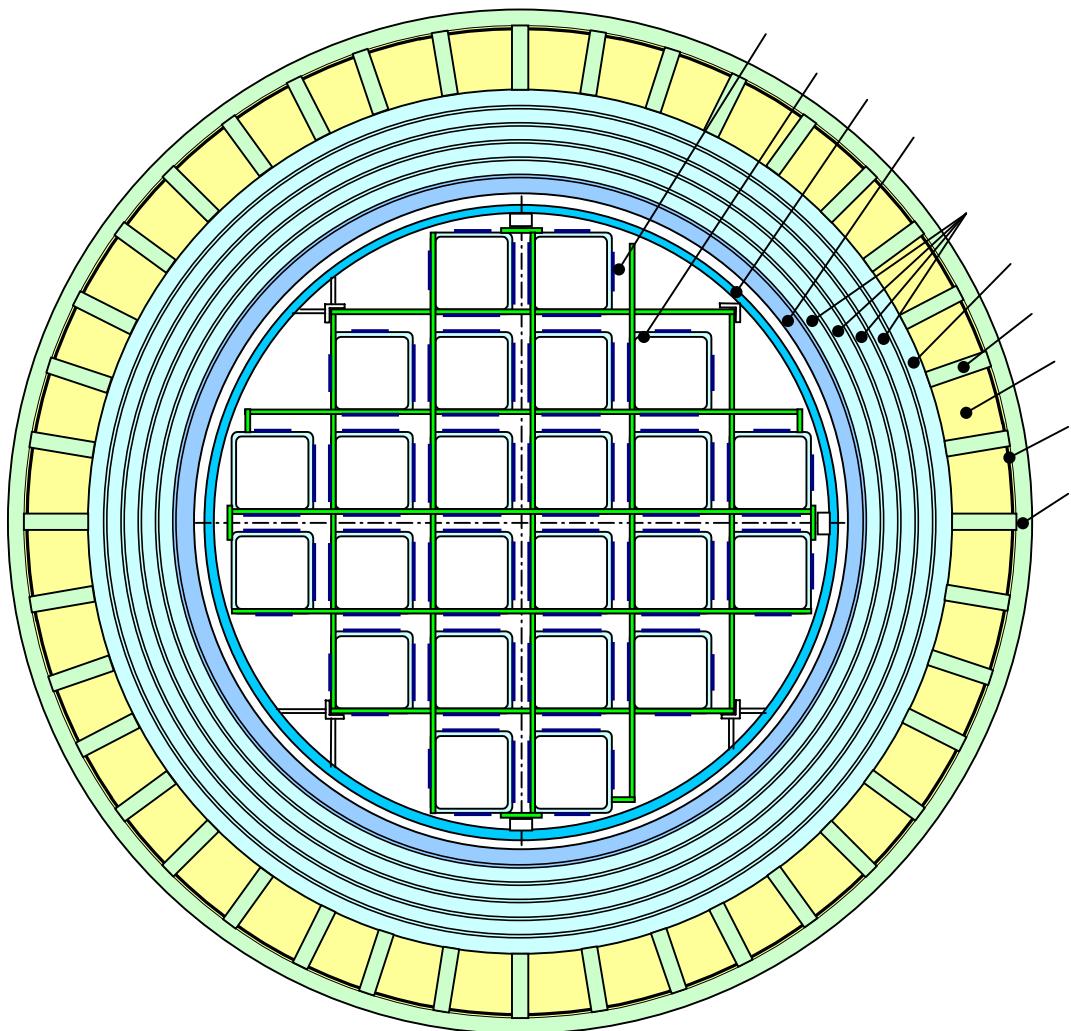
Cross Section Elevation View of Hi -Star 100 System.
